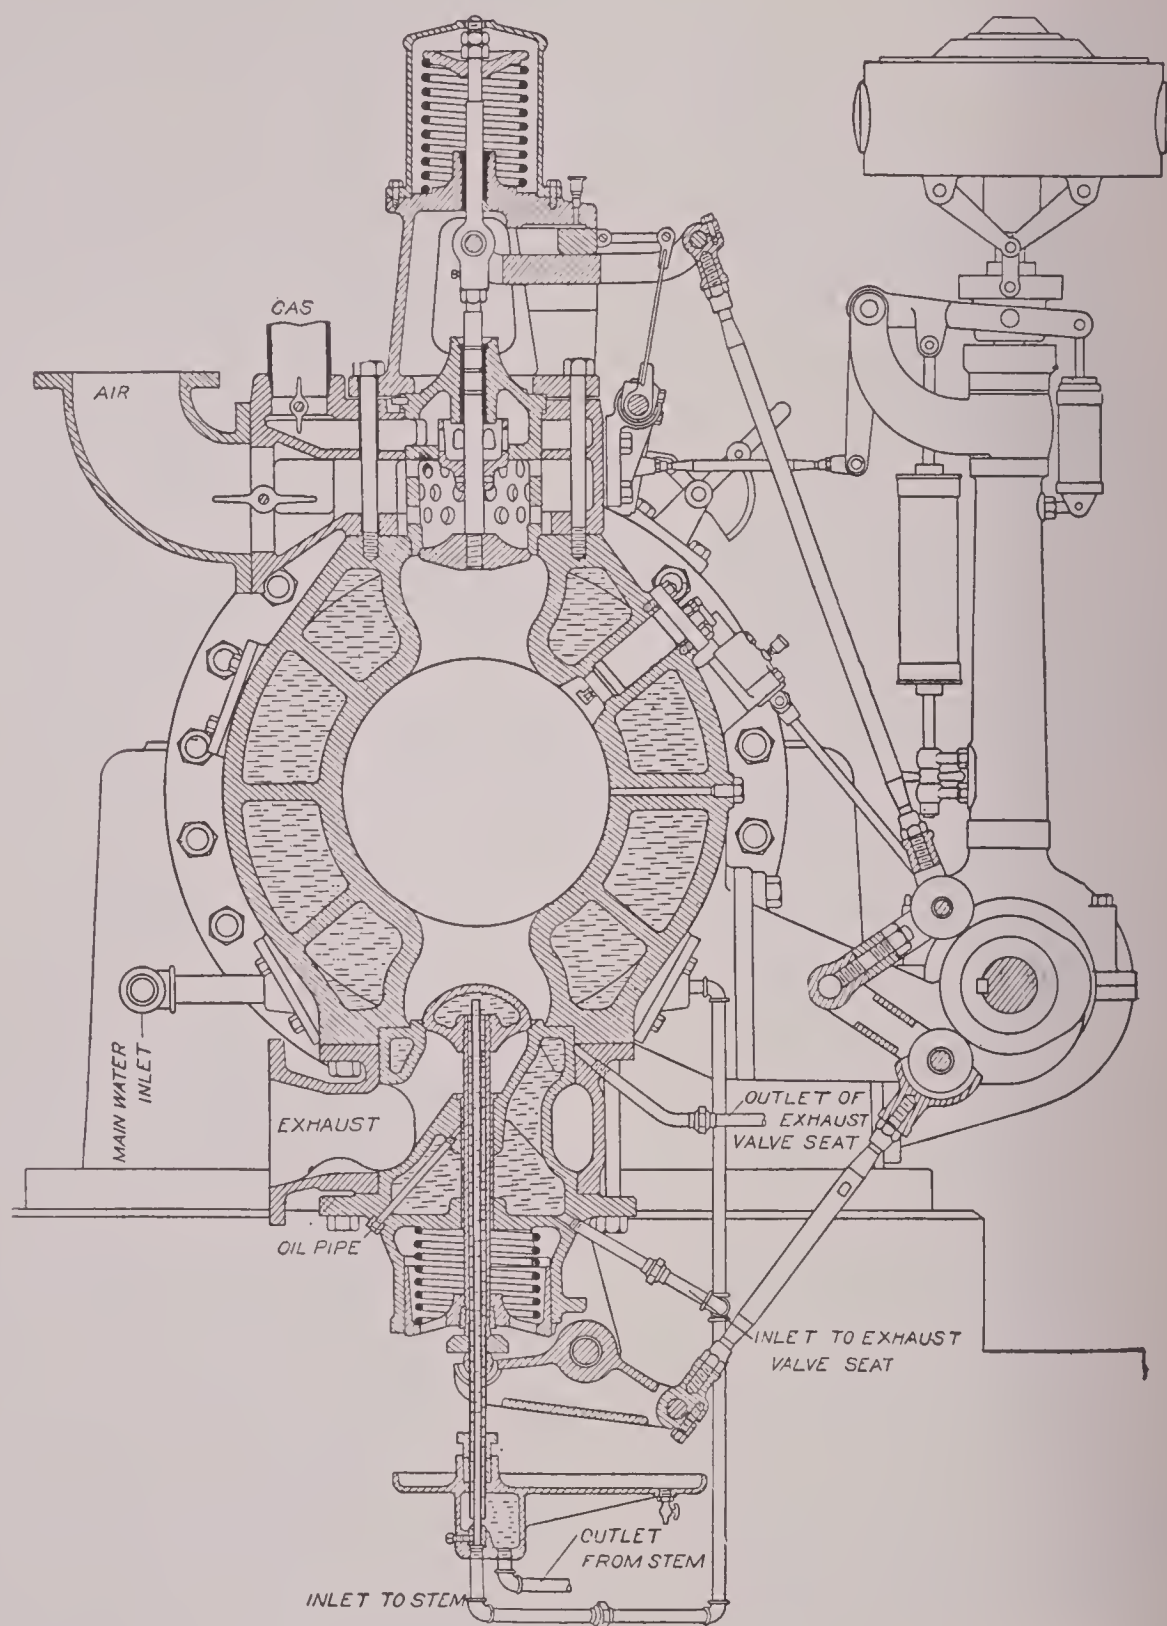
Cross-section of Cylinder and Valves, Struthers-Wells Single-acting Tandem Engine.
